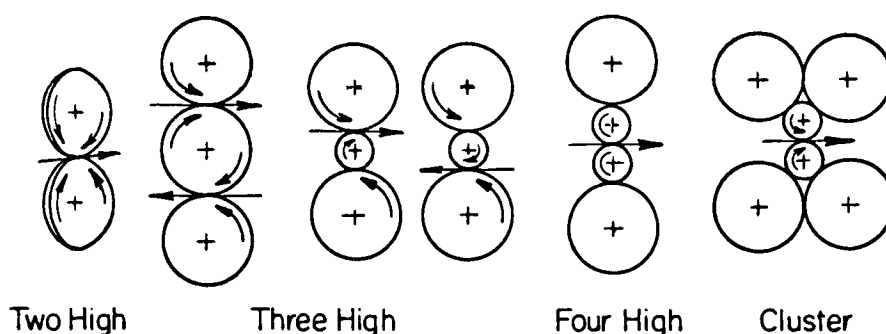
TYPICAL ROLLING-MILL DESIGNS
